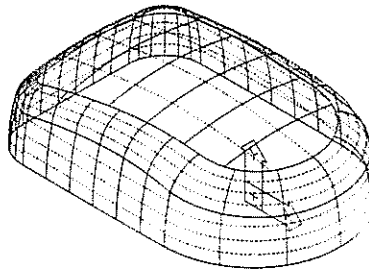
Top surface trimmed by copied edges, all surfaces unhidden
